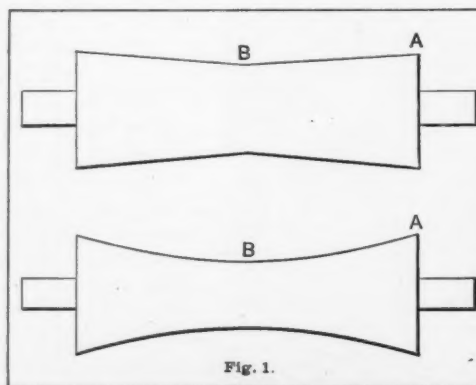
Double Cone Belt Conveyor Pulleys—Objectionable owing to their Variable Surface Speed
